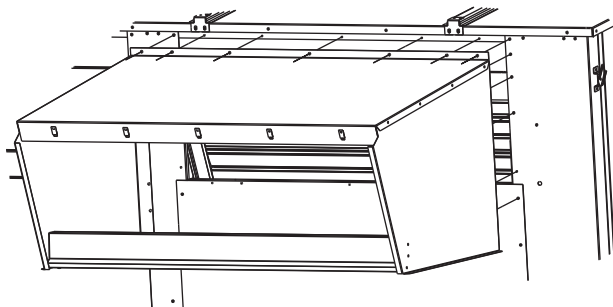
Removing Screws from the Outdoor Air Opening of Unit
